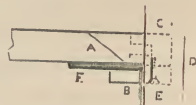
FRACTURE IN FRAME OF SEAT OF CHAIR.
